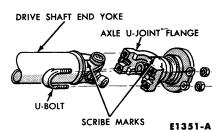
Drive Shaft-to-Axle U-Joint Connection
